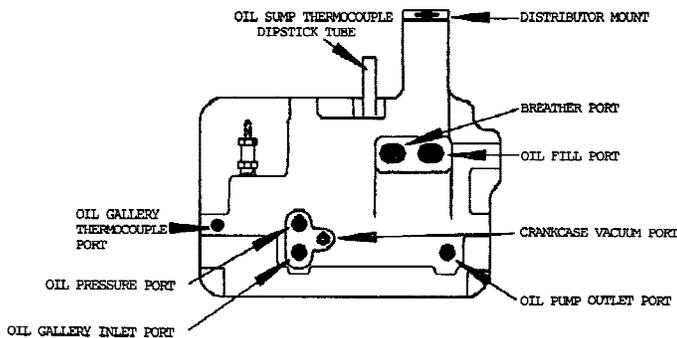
Oil Gallery Side Cover for the L-38 Engine Power Section
